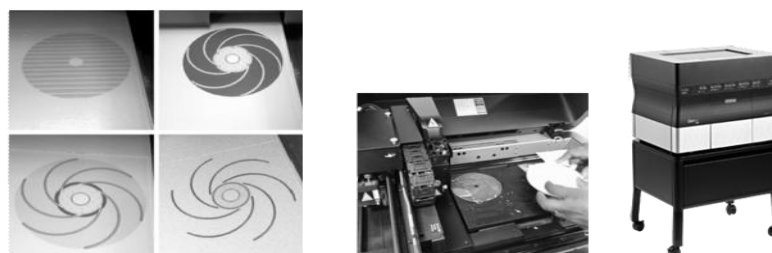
3D printer, left to right: schematic diagrams for 3D printing – CATIA output, details of the print area, 3D printer used
